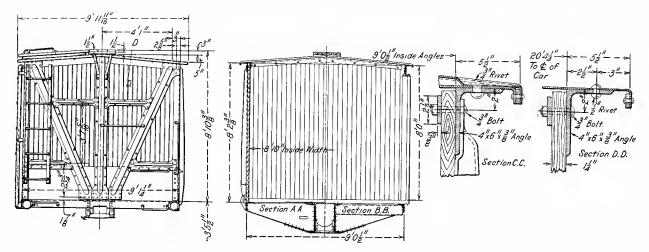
End Elevation and Cross Sections of Pennsylvania Steel Frame 50-Ton Capacity Box Car. The Dotted Lines at Top of Section "CC" Show Opening in Steel Roof Extending Between Carlines for Ventilation. See also Figs. 269 and 271.
